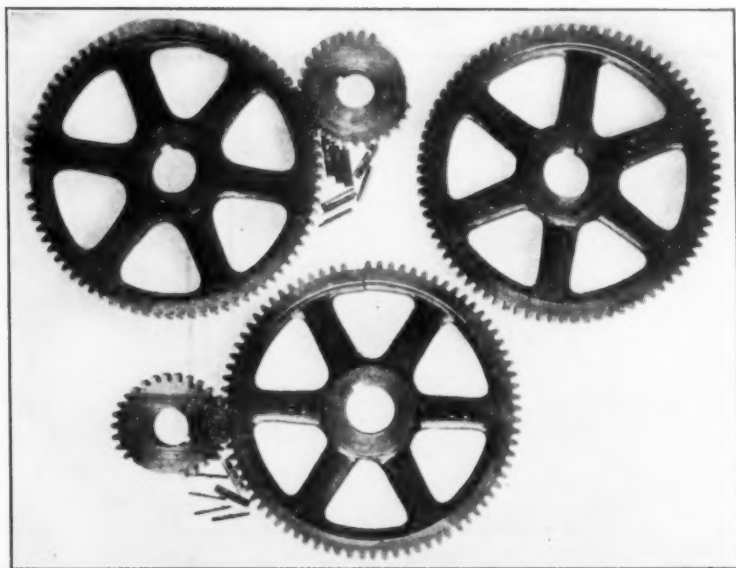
30 TOOTH ENGAGING 80 TOOTH, TESTS 38—40 INCLUSIVE, SERIES 2
